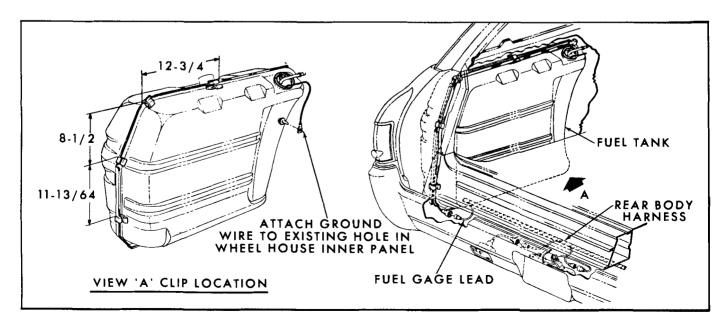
Fuel Tank Gage Unit Wiring (A Series Station Wagon)
